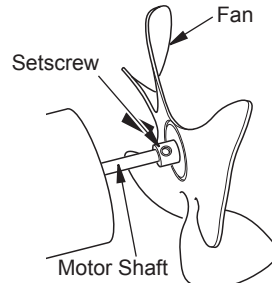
Fan, Motor Shaft, and Setscrew Location
